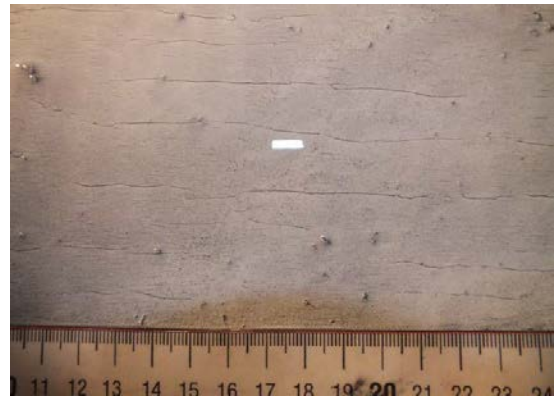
Appearance of a segment of the examined surface of parent material along the circumference of the vital butt-welded joint
